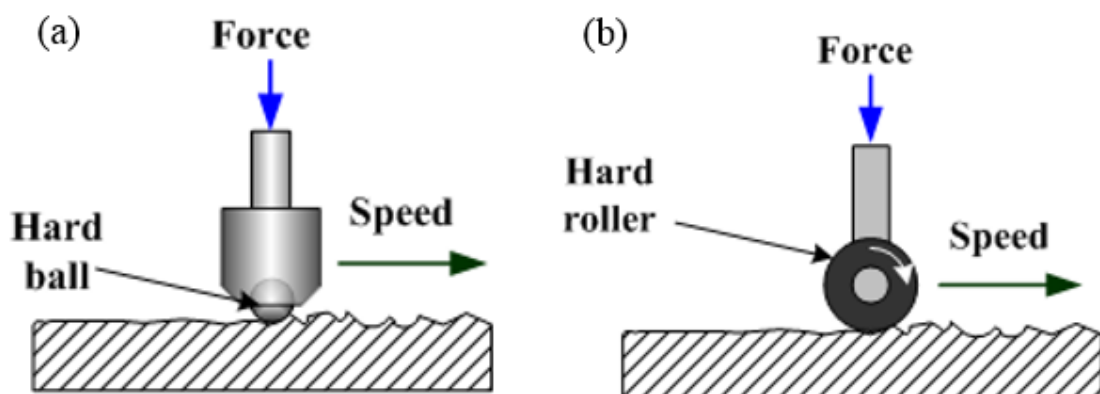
The schematics of burnishing process: (a) ball burnishing; and (b) roller burnishing (Substech, 2013).
